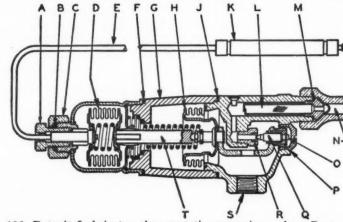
Detroit Lubricator thermostatic expansion valve. Parts of the valve are designated by letters as follows: (A) adjusting screw; (B) packing around adjusting screw; (C) packing nut; (D) thermostatic power element; (E) flexible capillary tube; (F) moisture-tight joint; (G) bakelite extension; (H) bellows seal; (J) moisture-tight joint; (K) thermostatic bulb; (L) strainer screen; (M) copper gasket; (N) inlet connection for 1/4-inch copper tube; (O) needle swivel; (P) soldersealed plug; (Q) stainless steel needle; (R) stainless steel seat; (S) outlet connection; (T) bakelite push-rod.
